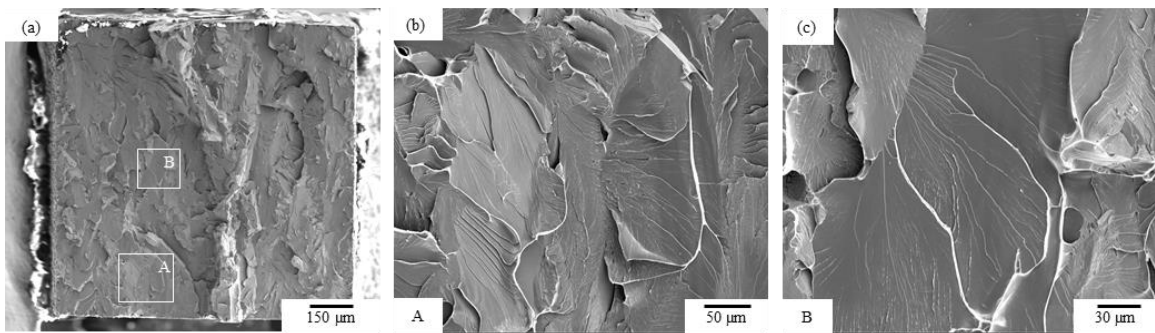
Secondary electron images of the fracture surface after tensile test.
